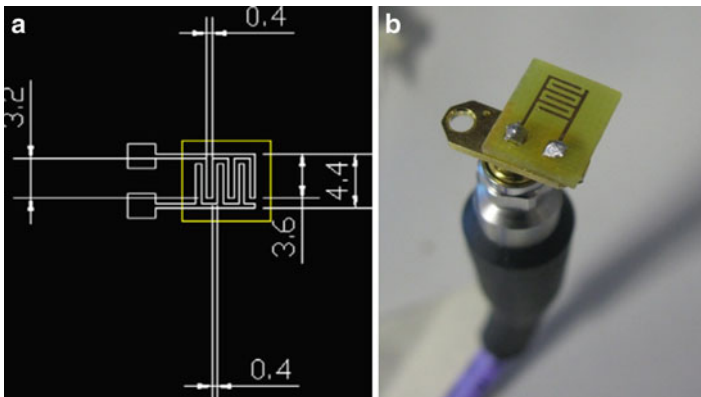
(a) CAD layout of Cu IDE pattern; (b) Cu IDE on FR4 substrate with SMA connector and N-type cable
